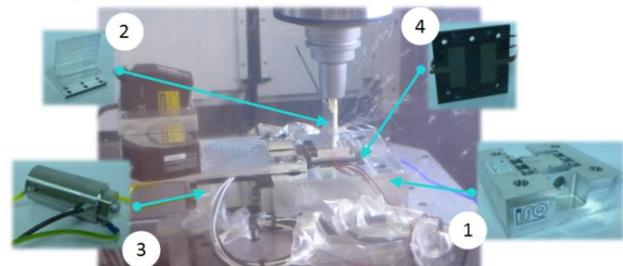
Prototype during milling process and highlighted components; (1) - frame, (2) - impeller blade, (3) - actuator, (4) - sensor system
